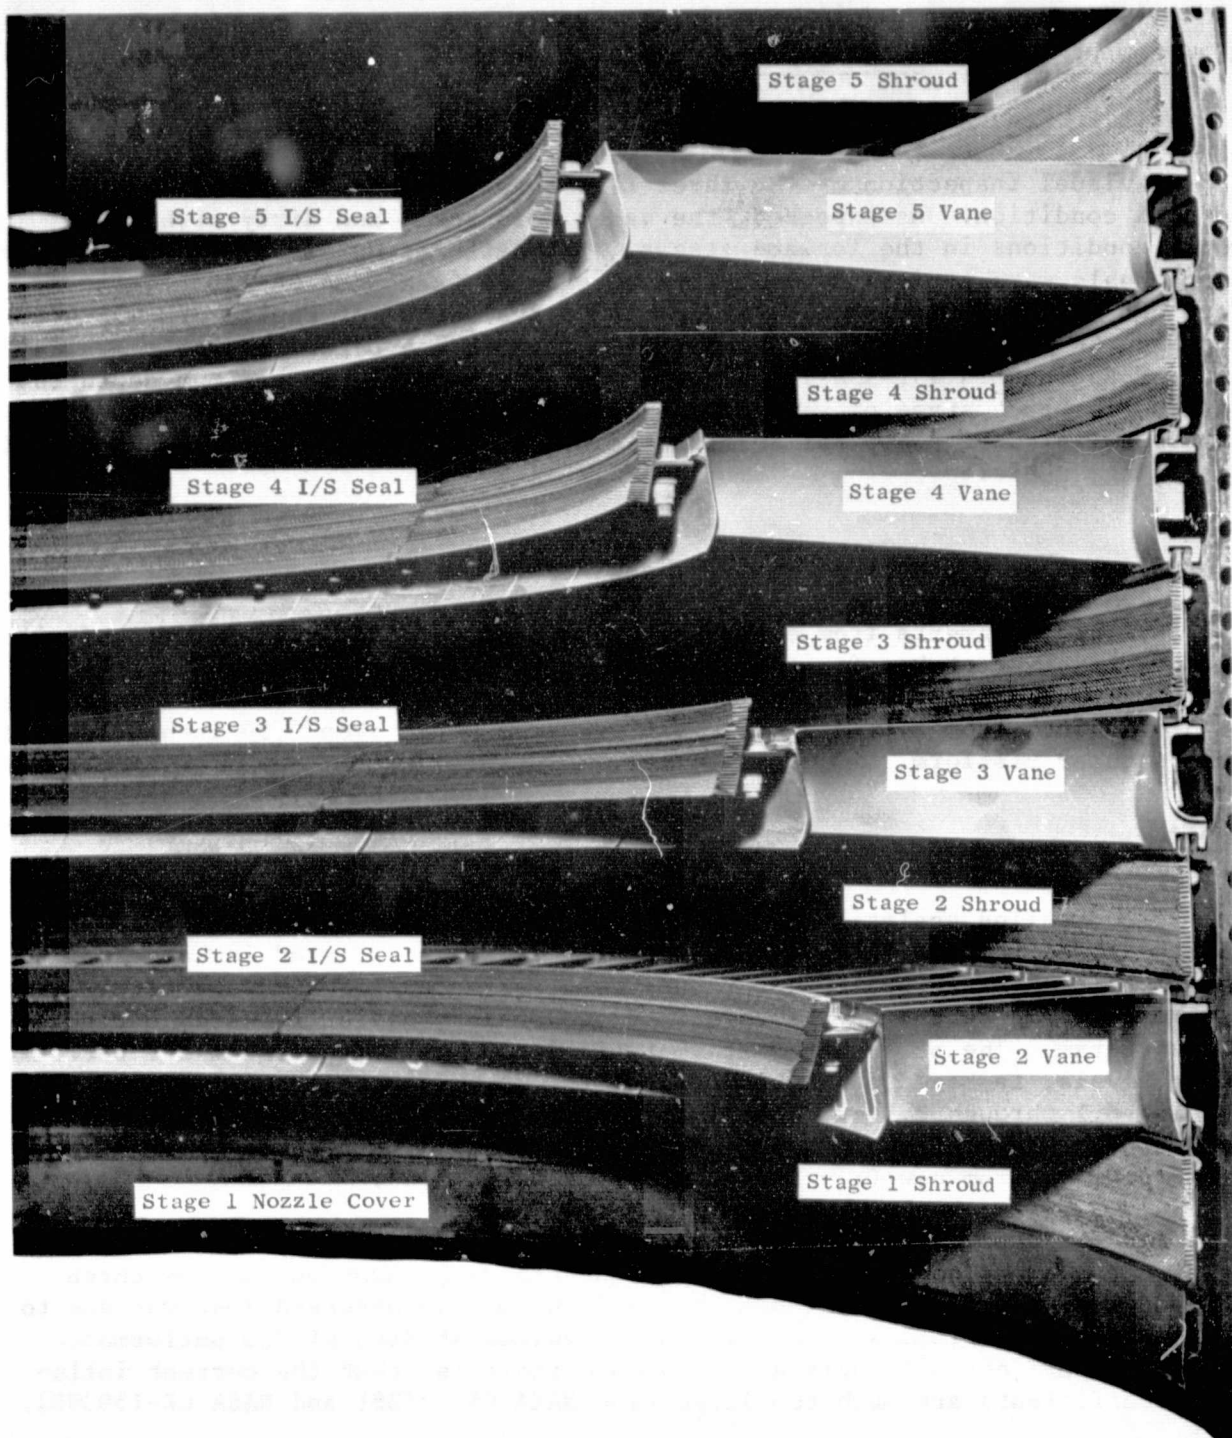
LP Turbine Stator Assembly, End View of Shroud and Seal Rubs.
